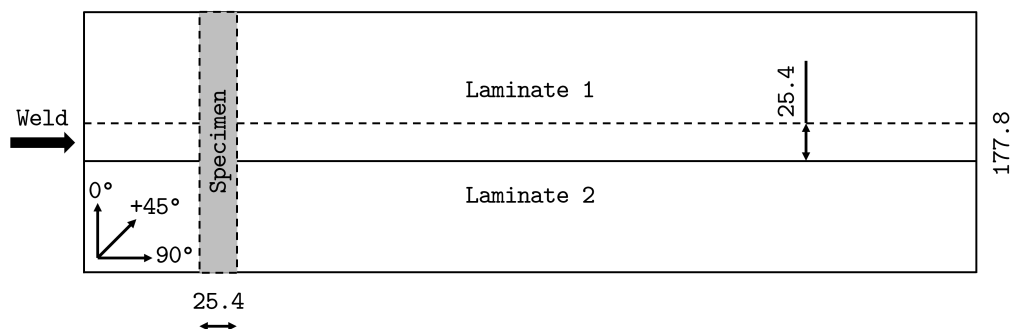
Welding of laminates and cutting of specimens. Dimensions in mm.
